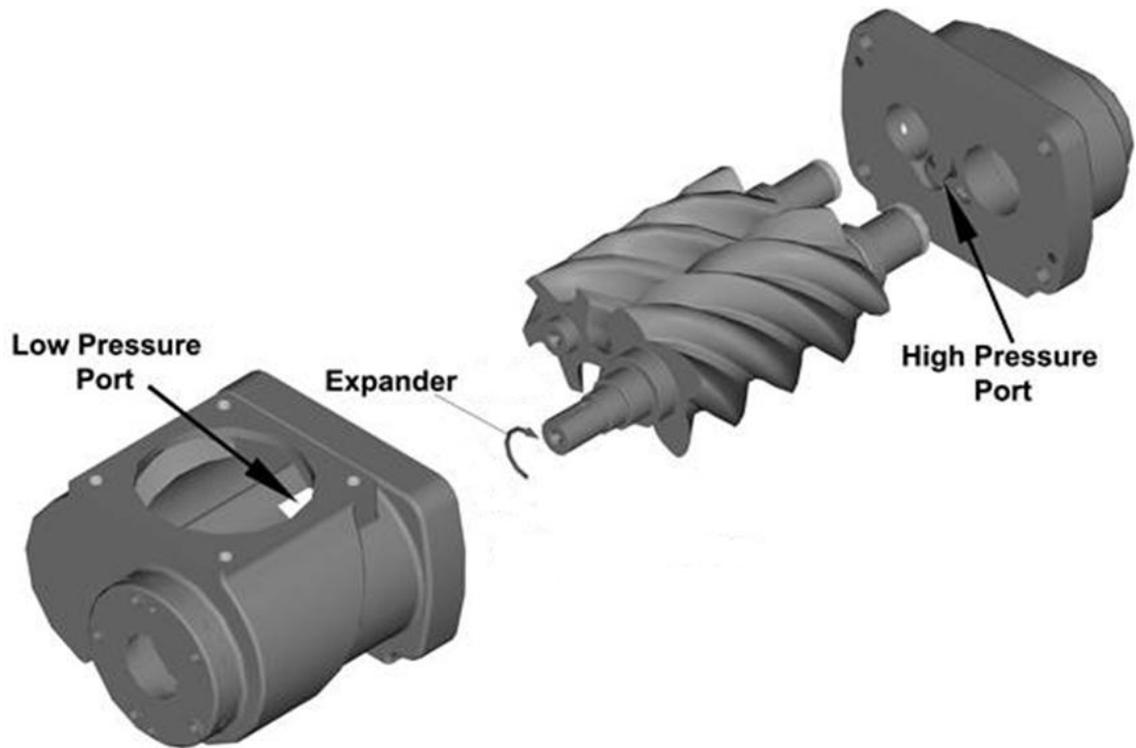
Twin screw expander, a positive displacement machine with pressure ports and direction of rotation [5]
